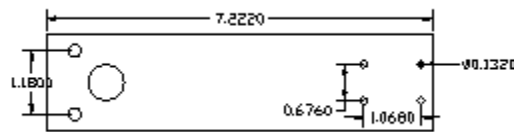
CAD drawing of the bottom view of the base of the frame (units in inches)
